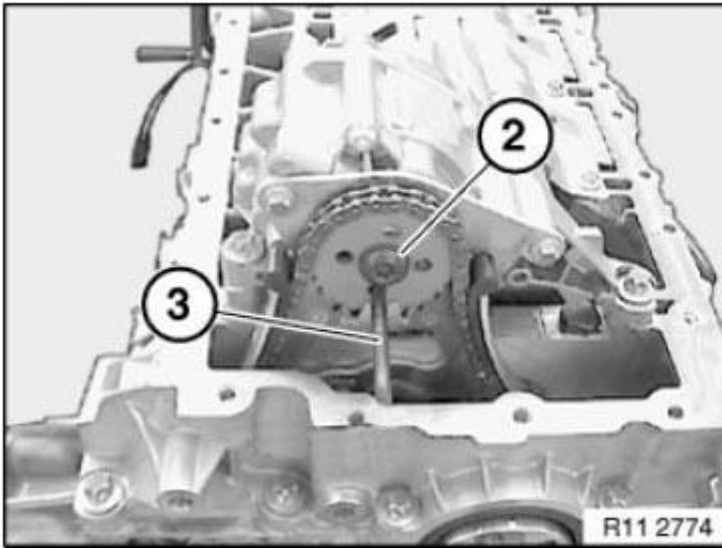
Identifying Oil Pump Drive Gear And Steel Pin
